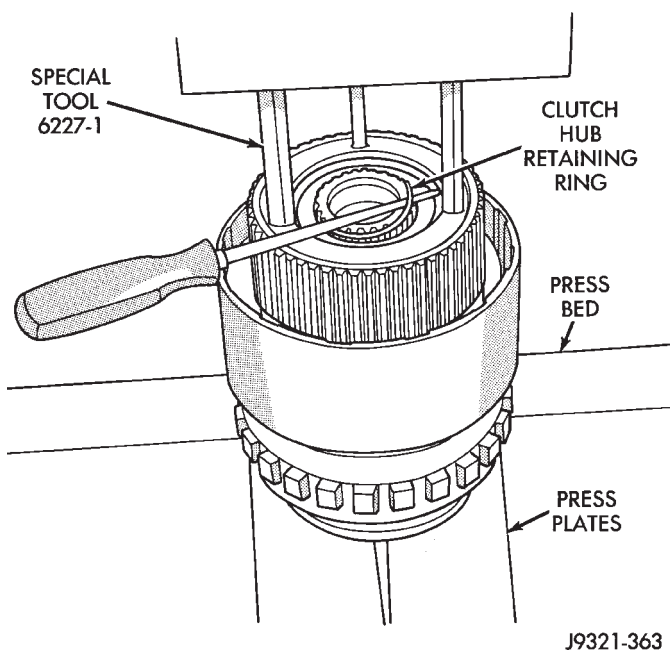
Direct Clutch Hub Retaining Ring Removal
